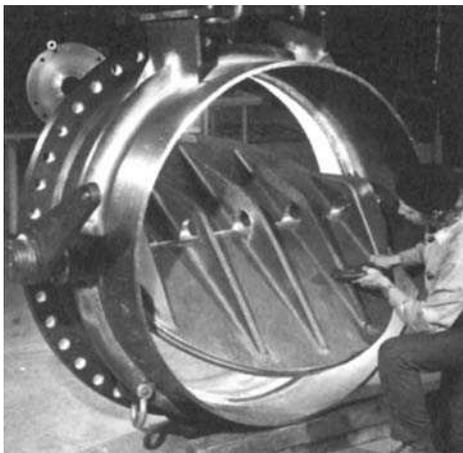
A 1.37 m (54 in.) diam aluminum bronze stop valve for power-generation cooling loop applications using a centrifugally cast body and a sand cast disk assembly. Seating surface is cold-rolled plate welded to the valve body with aluminum bronze spooled wire.
